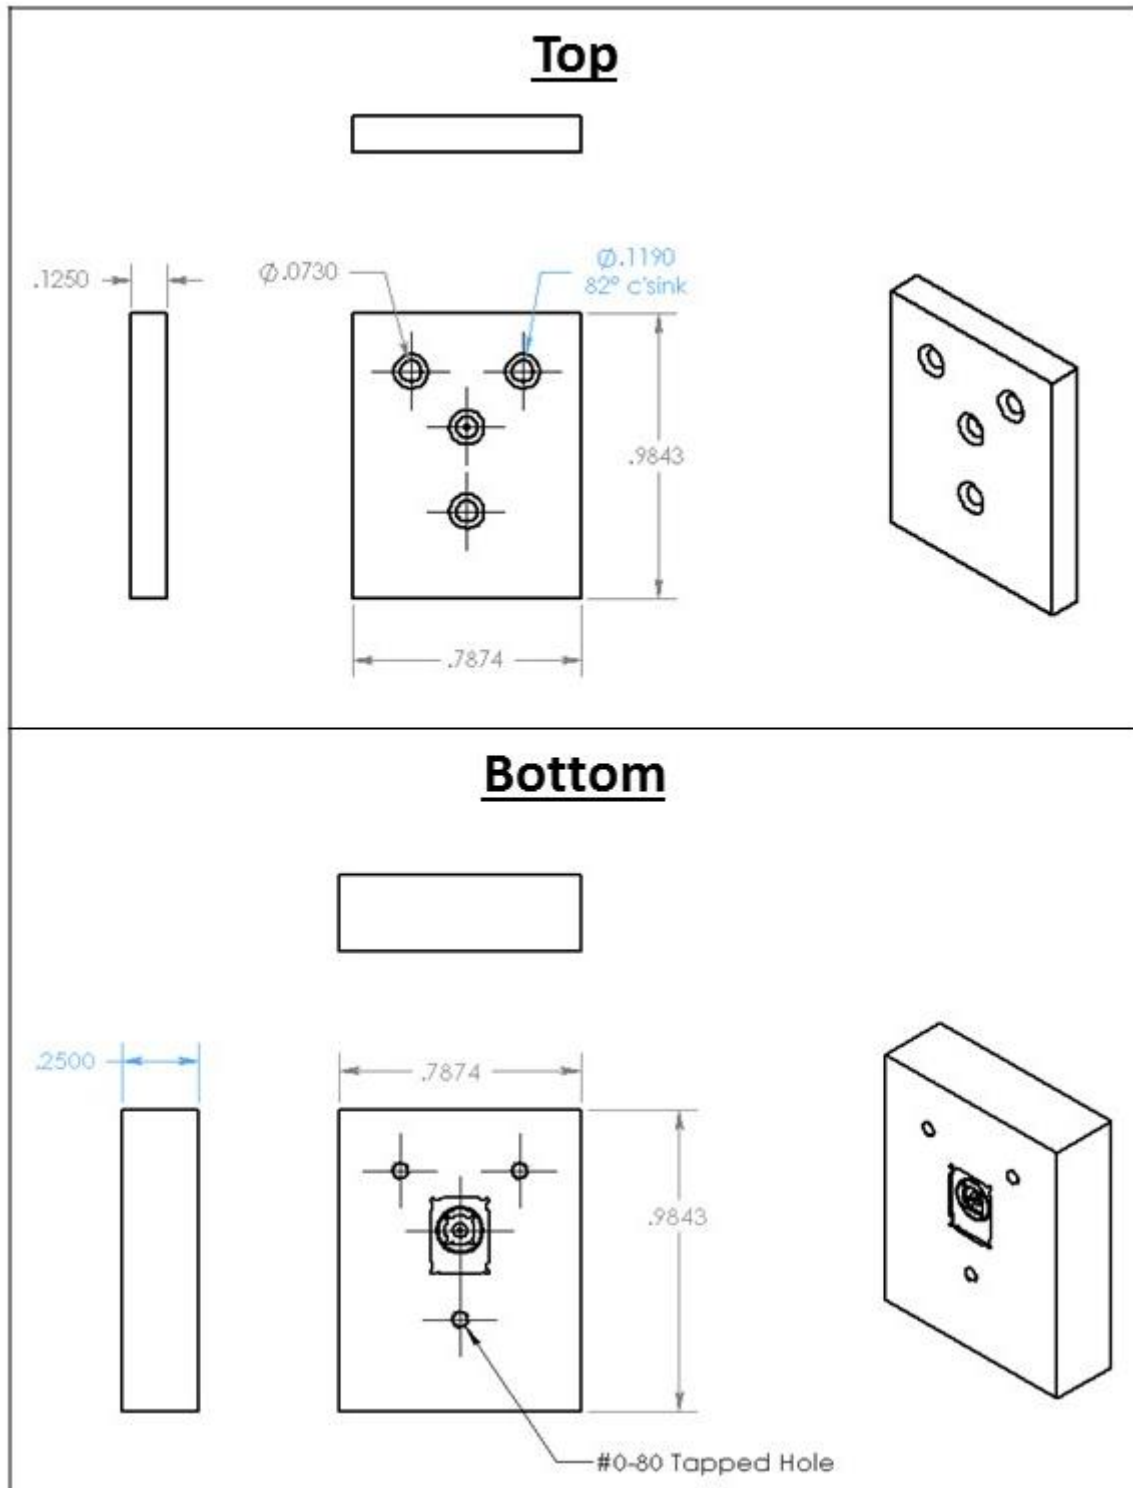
Indium sealing press chuck design. Top and bottom parts are screwed together in order to compress the evaporated indium on the top chip onto the graphene covered bottom chip.
